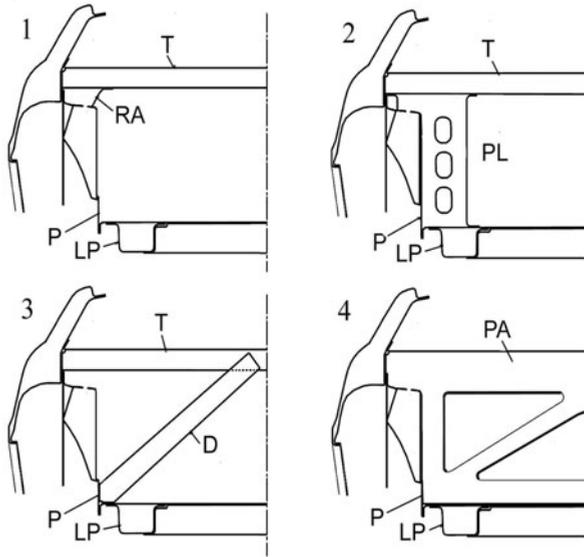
Schematic examples of rear seat pan adopted to stiffen three-box cars with fixed back glass. LP) rear rail; P) inner wheel house; T) pillar bar or crossmember; RA) corner brace; PL) side brace; D) diagonal members; PA) closed rear seat pan.
